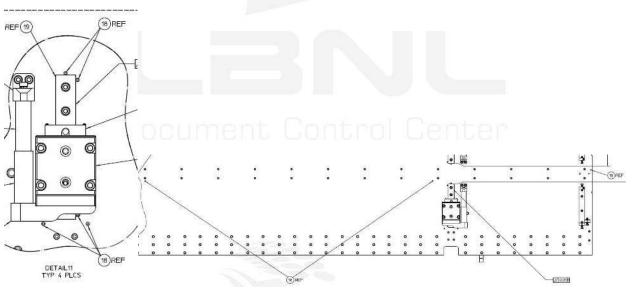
Parts of 29H947 Rev D that show where to place locating pins. Always use most recent revision of drawing.
